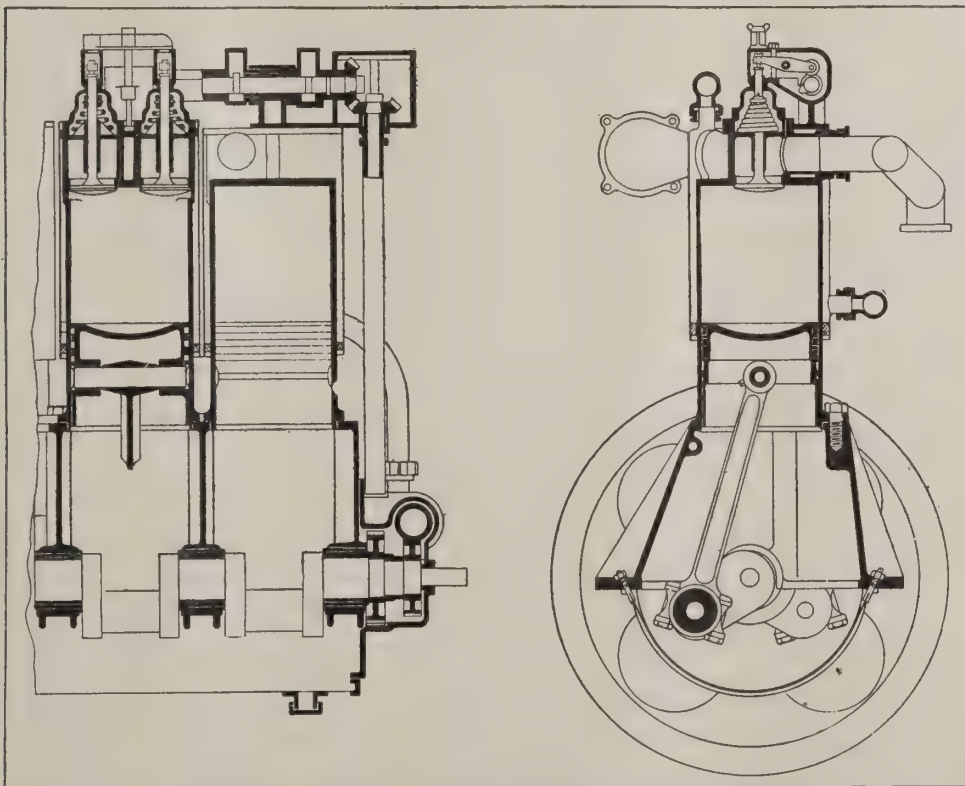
120 H.P. Six-Cylinder Green Engine, which has won several prizes in England. The lower end of the water-jacket is held in place by a rubber ring
